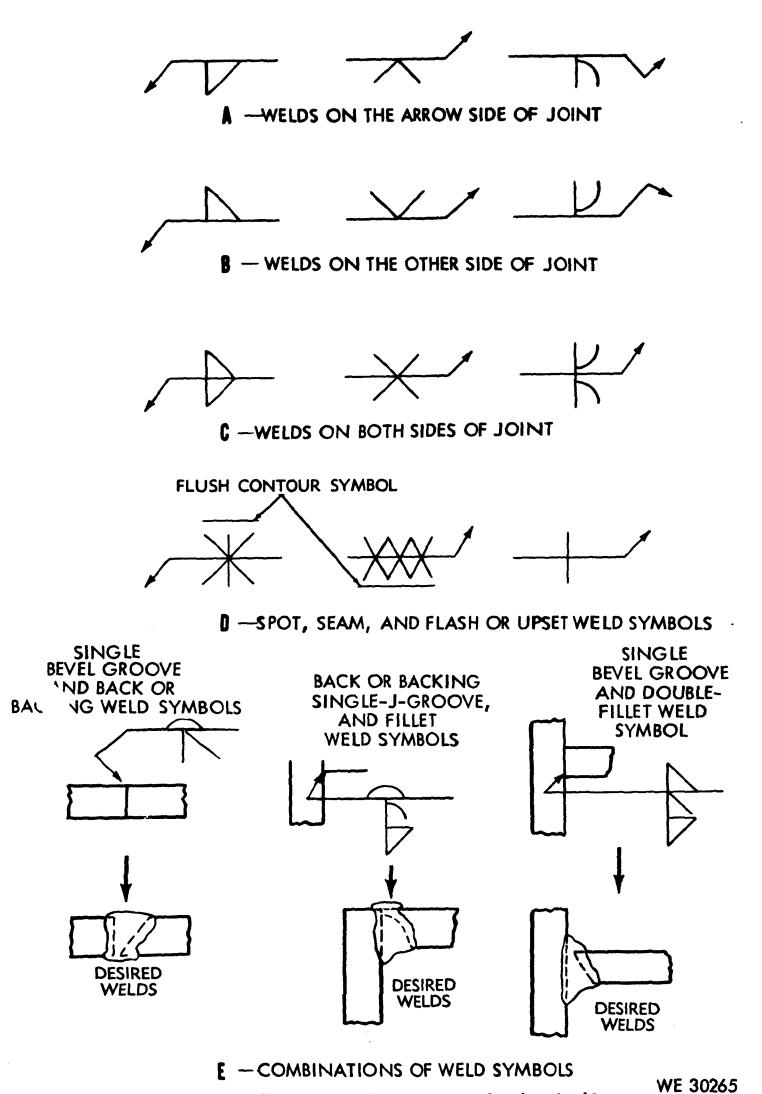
Welding symbols indicating type and location of welds.
